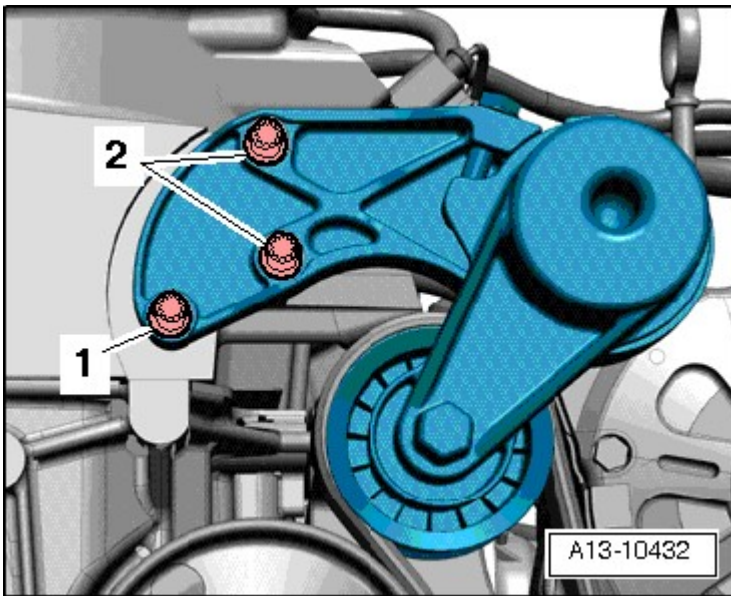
Identifying Bolts -1 And 2- To Ribbed Belt Tensioner
